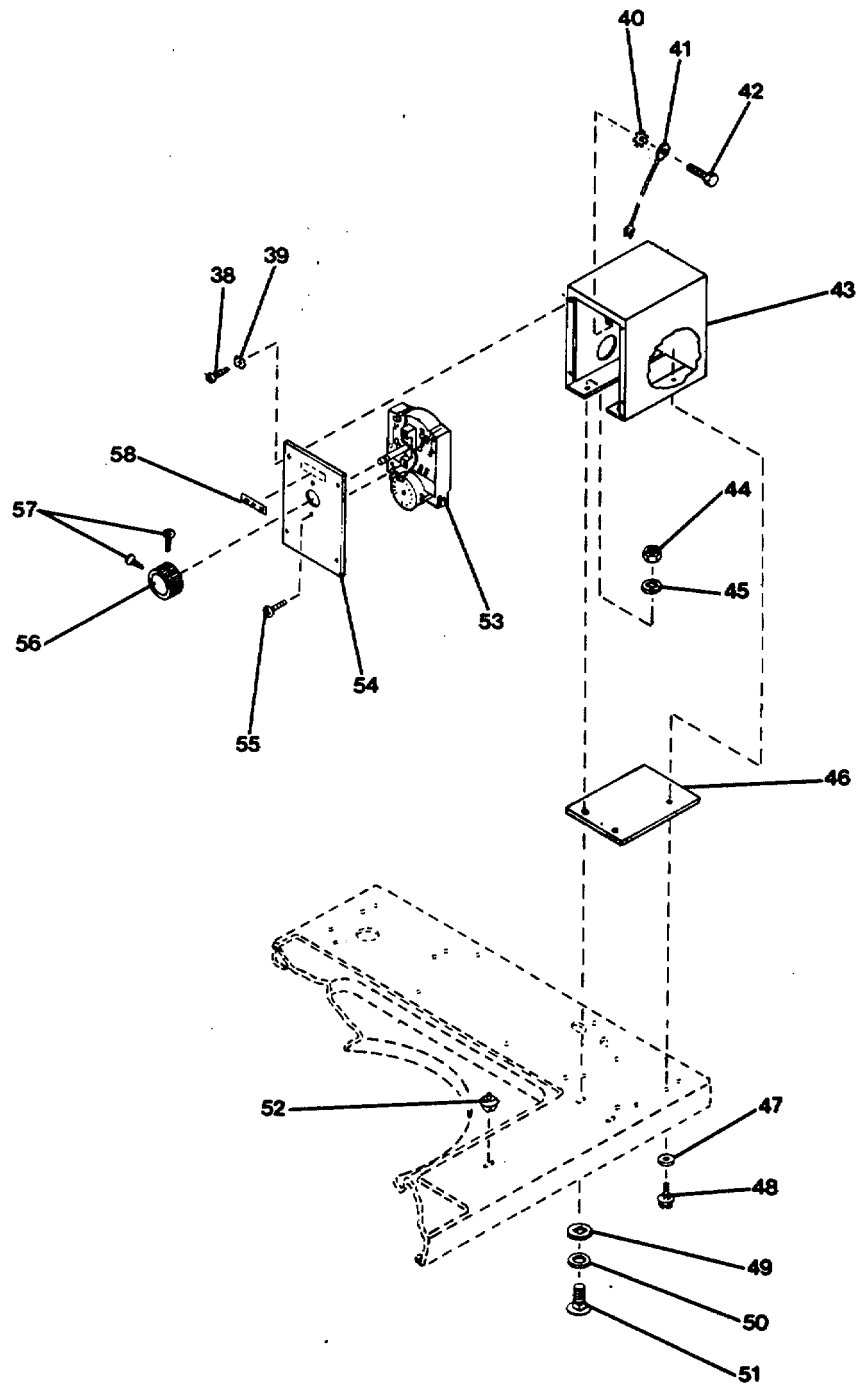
Washer Machine (Sheet 2 of 5).
